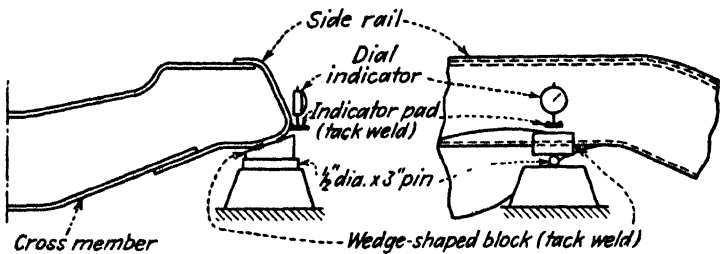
METHOD OF SUPPORTING FRONT END OF FRAME FOR BENDING TEST.
